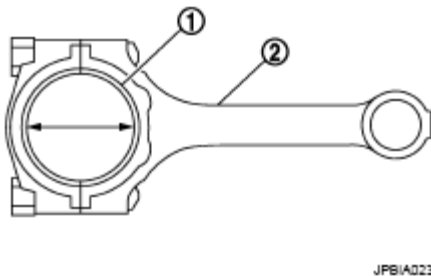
Identifying Connecting Rod Bearings To Connecting Rod
